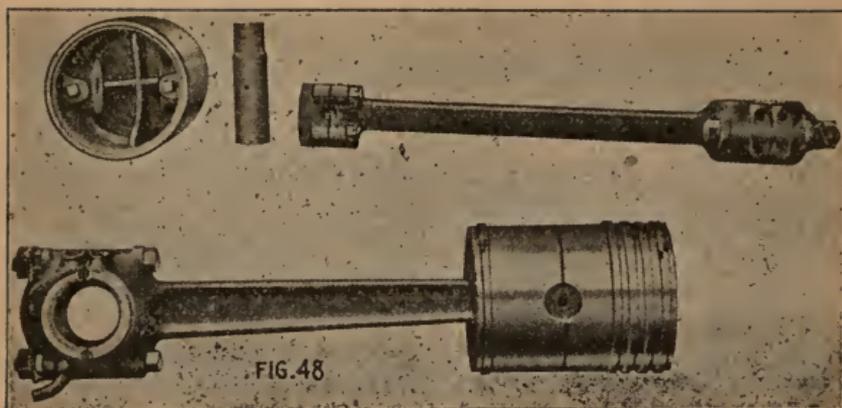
Detail of piston, piston pin and connecting rod of Aultman-Taylor tractor.
